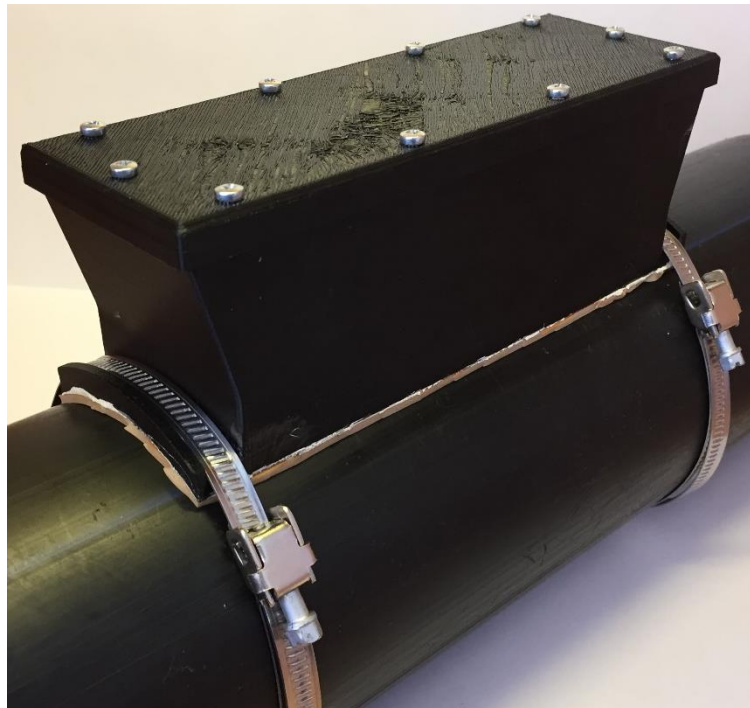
Version 2 assembled and installed on 110 mm diameter pipe.
